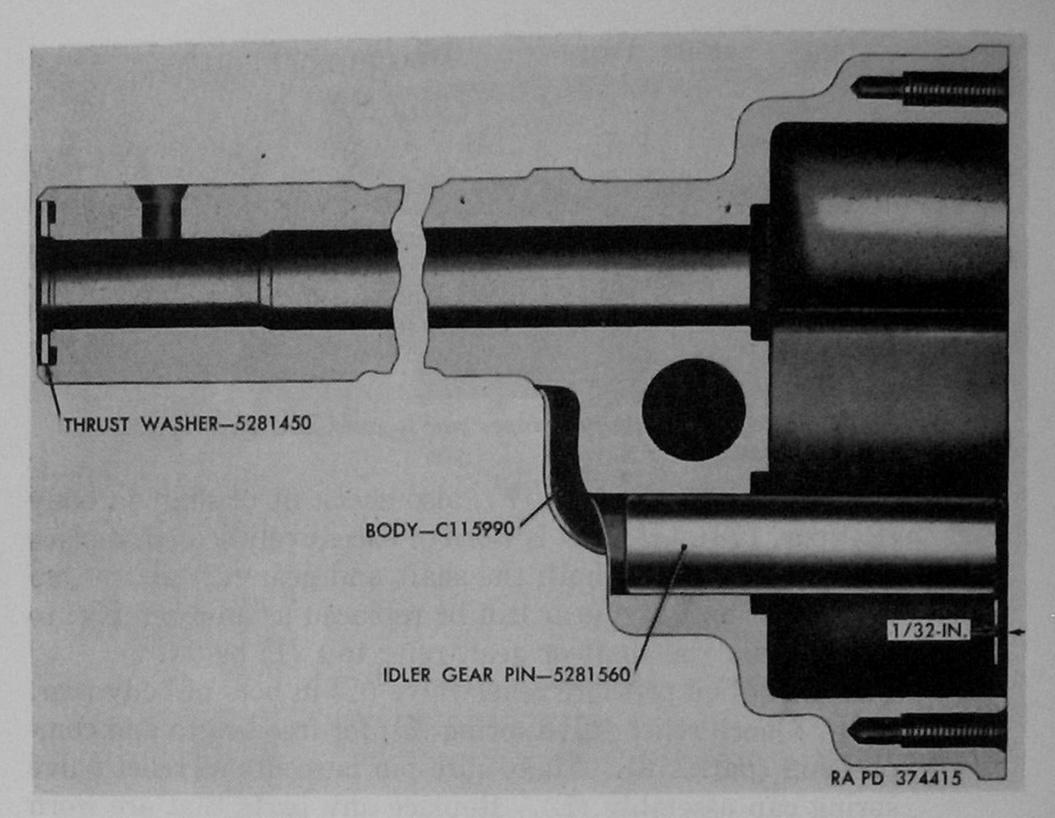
Oil pump body, idler gear pin, and thrust washer assembled.
